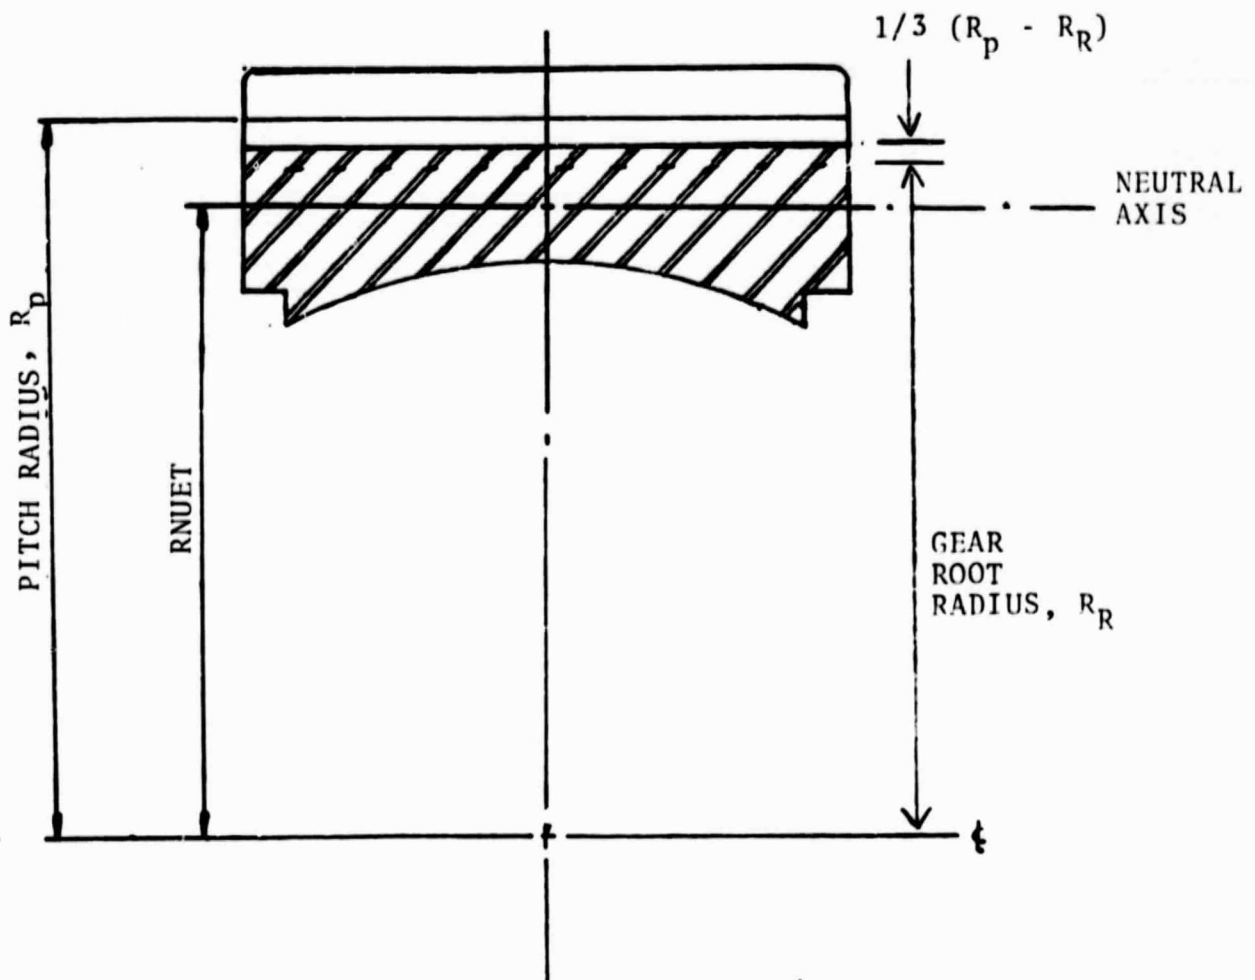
PLANET GEAR OUTER RING CROSS-SECTION
